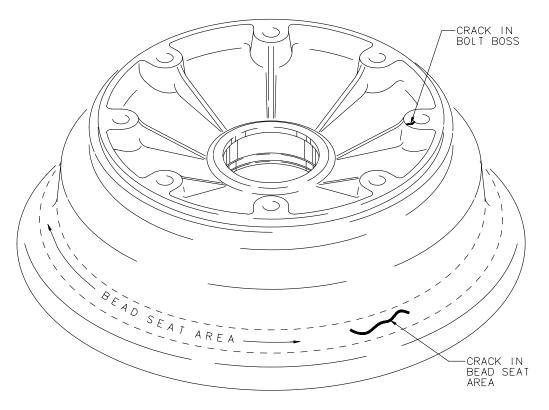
Wheel Half Examination – Inboard Wheel Half Shown
